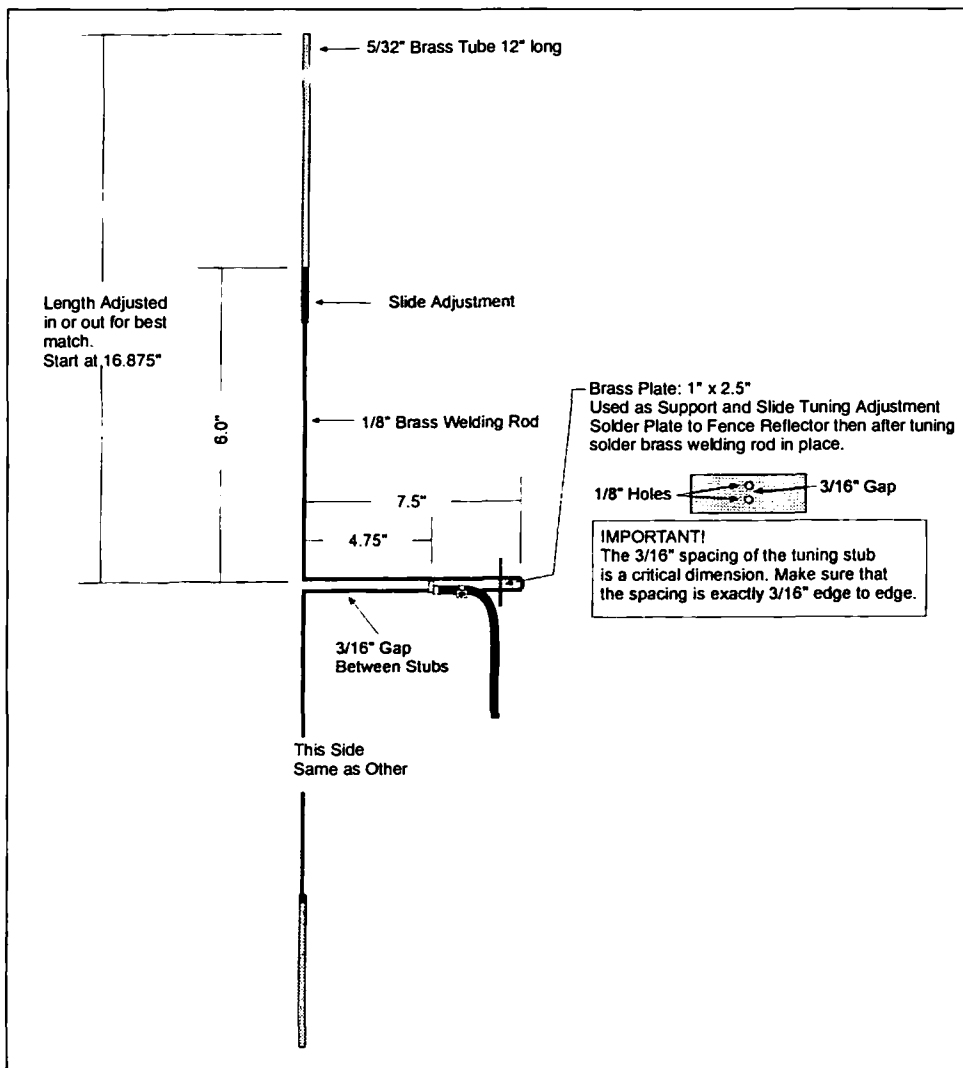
Construction details of the Hog Fence antenna's driven element, mounting plate and tuning stub. The brass support plate is first soldered to the fence reflector. Solder the brass welding rod to the brass plate only after final tuning is complete.
